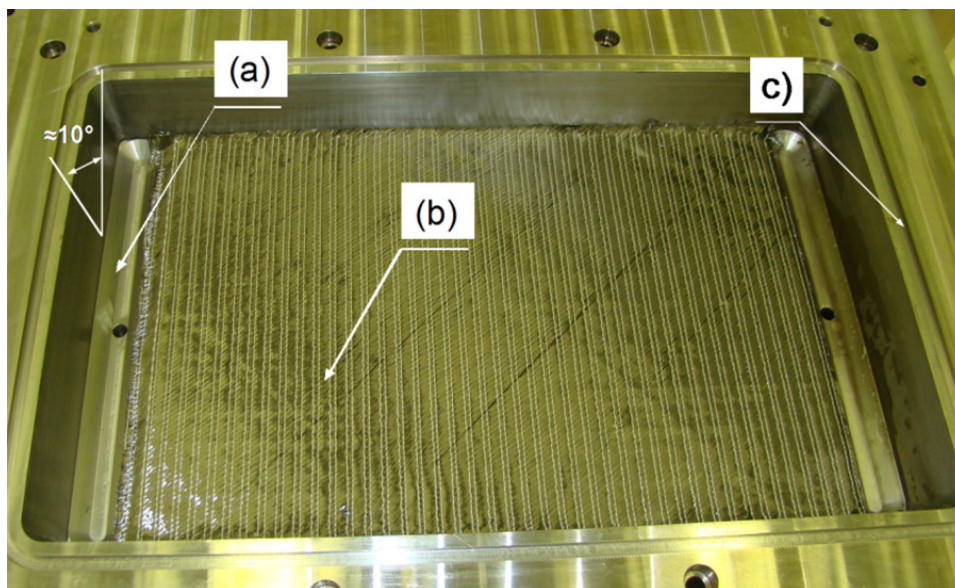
Female tool mold details: (a) line inlet gate; (b) carbon fiber preform; (c) sealing channel.
